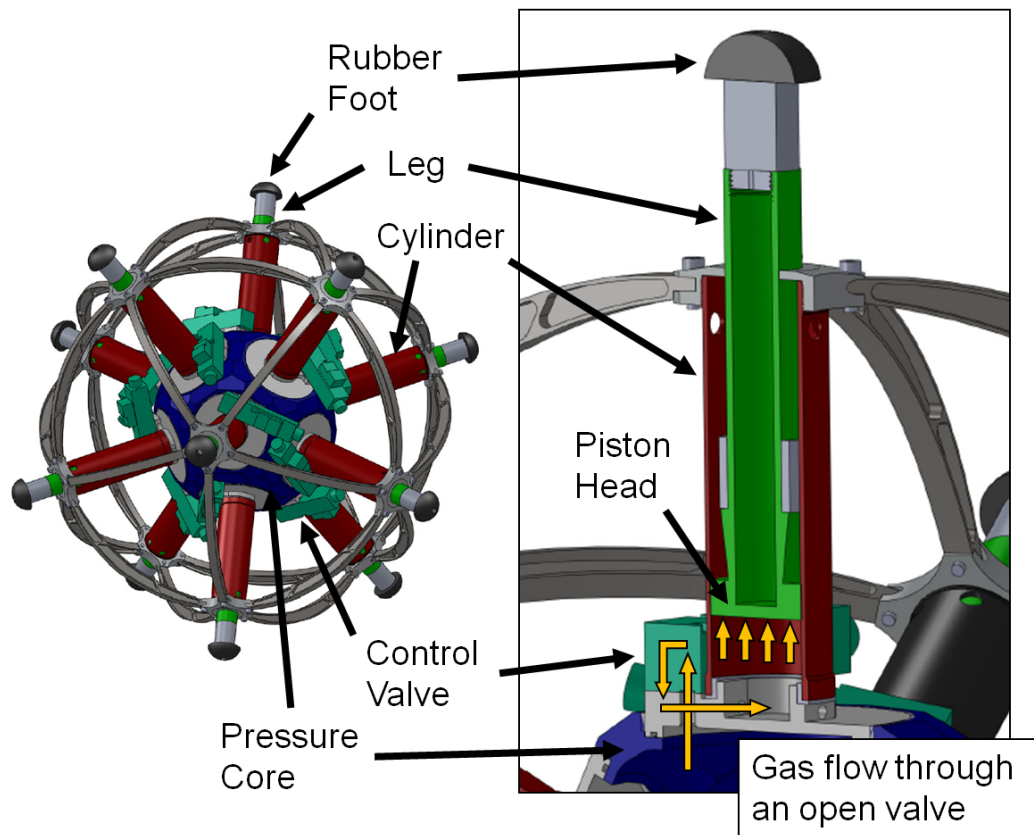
CAD drawing of latest 12-legged pneumatic RATS prototype. Cut-away shows leg piston design with the path of gas flow from the pressure core, through the control valve, and into the cylinder.
